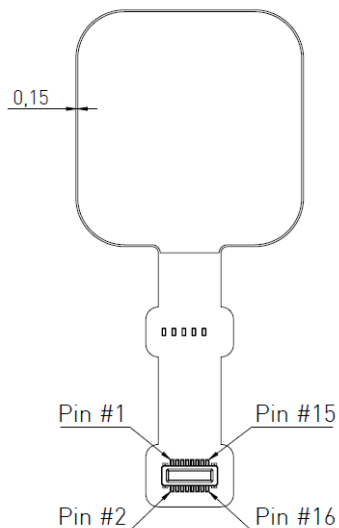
Part Drawing FPC1020AM CM04 – bottom view
